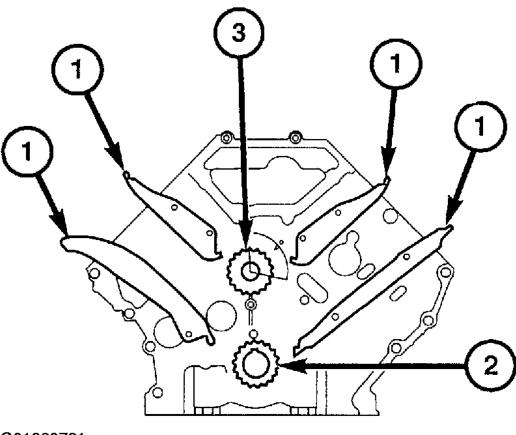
Aligning Balance Shaft Sprocket With Timing Mark & Inserting & Aligning Camshaft Sprockets
